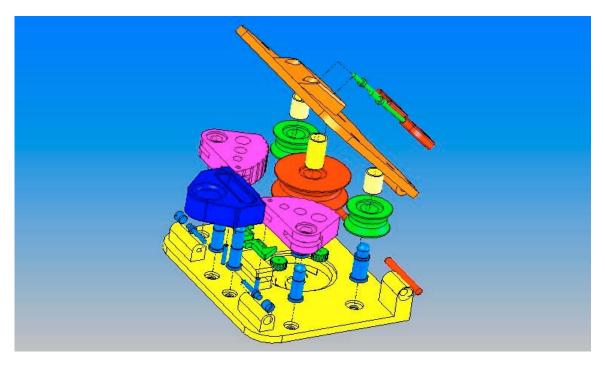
SOLIDworks Exploded View of the Back Up Fall Arrest Device Assembly
